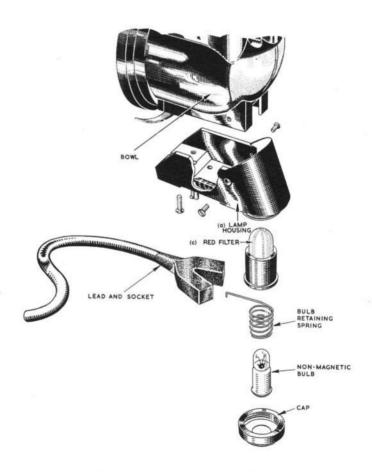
Exploded View showing Lighting Unit on KCA-0104 Type Compasses.
